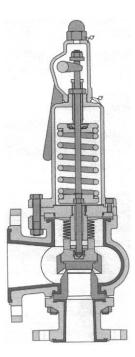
A lined metal-body spring-loaded relief valve Courtesy of Richter Chemie-Technik GmbH
